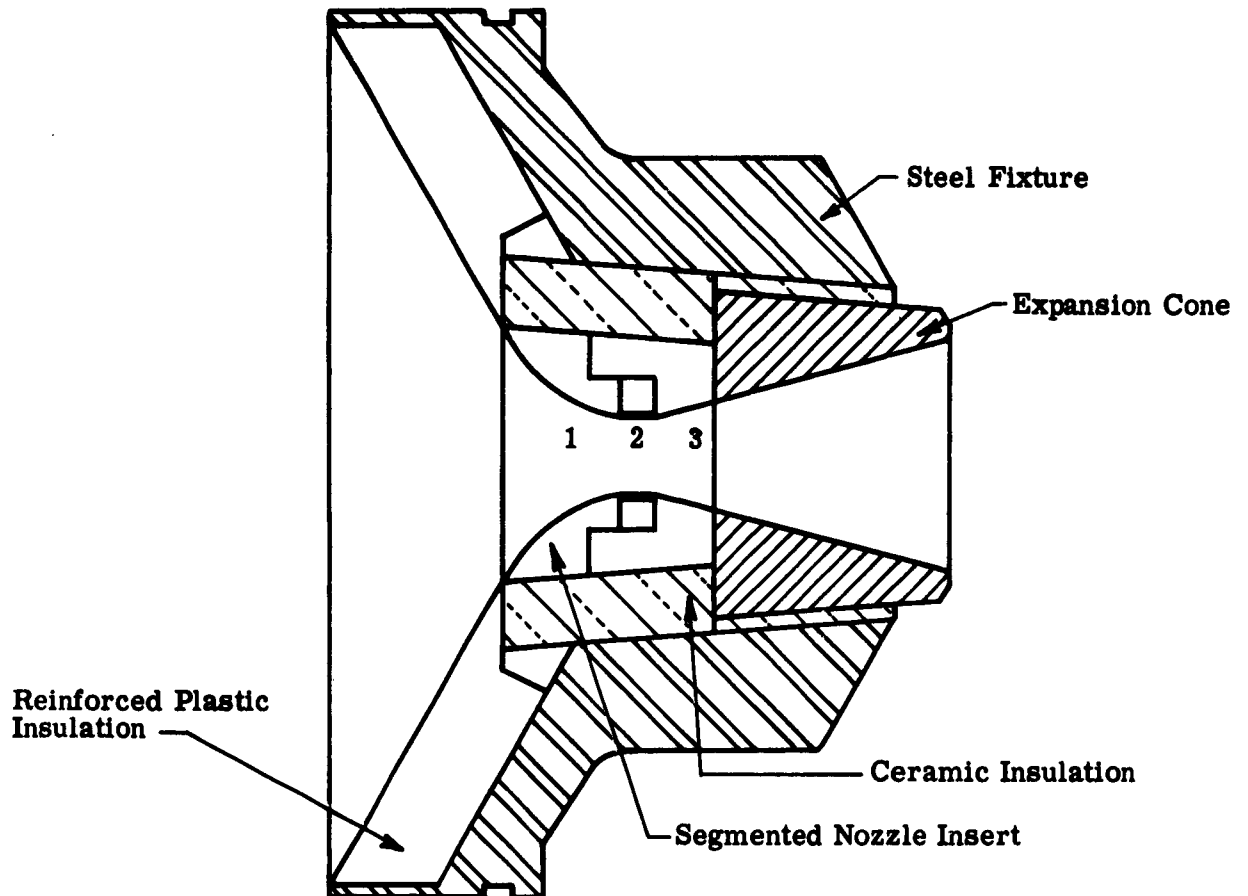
Nozzle Assembly with Segmented Nozzle Insert for
